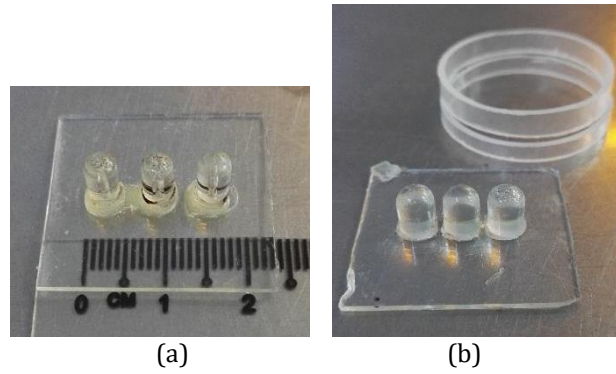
Master mold made of glass (a) and (b) master mold and side mold.
